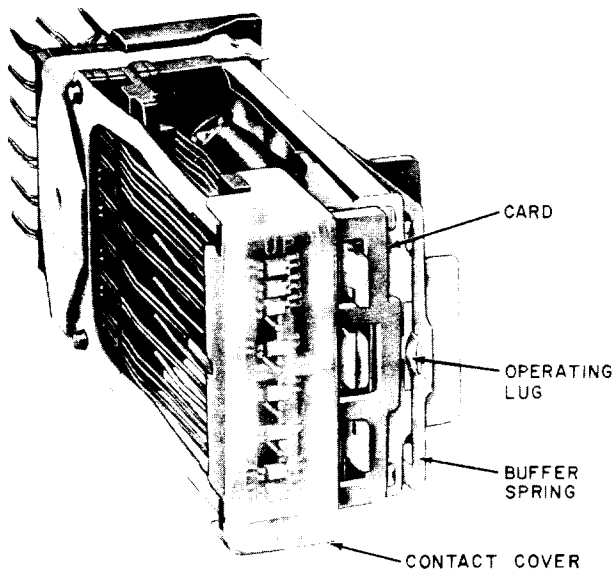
Wire Spring Relay Equipped With Buffer Spring—Side View
